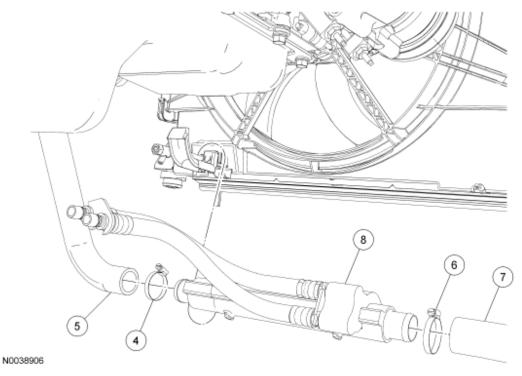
Exploded View Of Oil Cooler (2 Of 2) Courtesy of FORD MOTOR CO.
